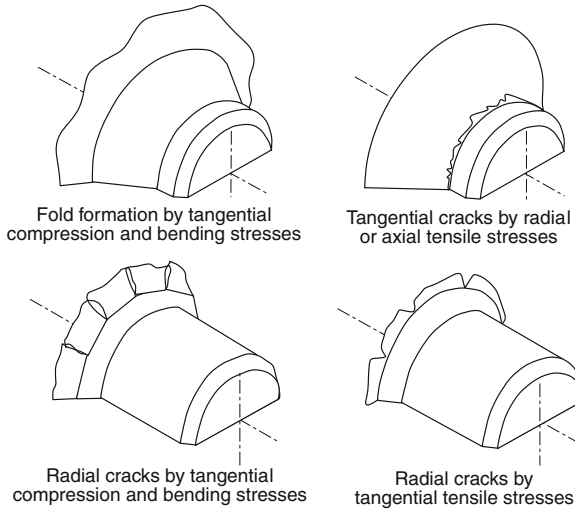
Manufacturing defects in pressing a cup [KÜHN82]
